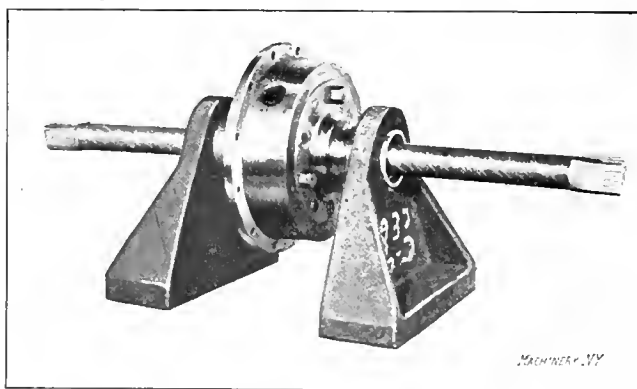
A Completed Equalizing Gear, Set up for Testing to Destruction by Torsional Stress
